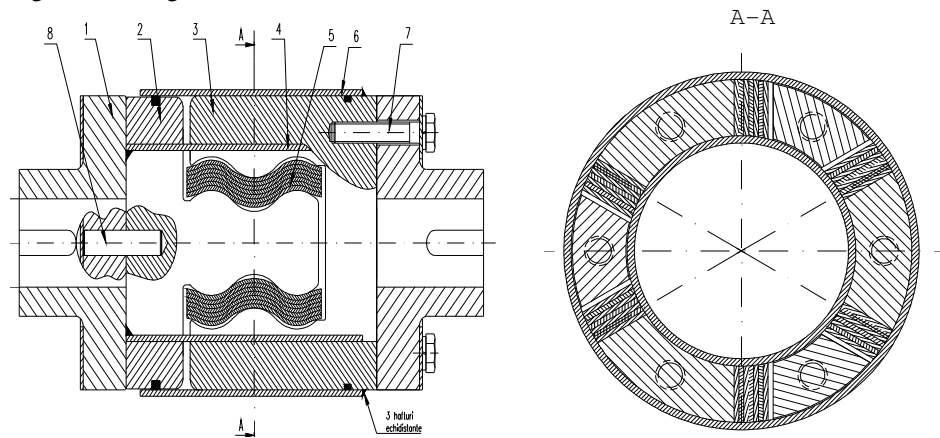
SERB-LEL-02 type coupling – longitudinal section (a) and cross section (b).
